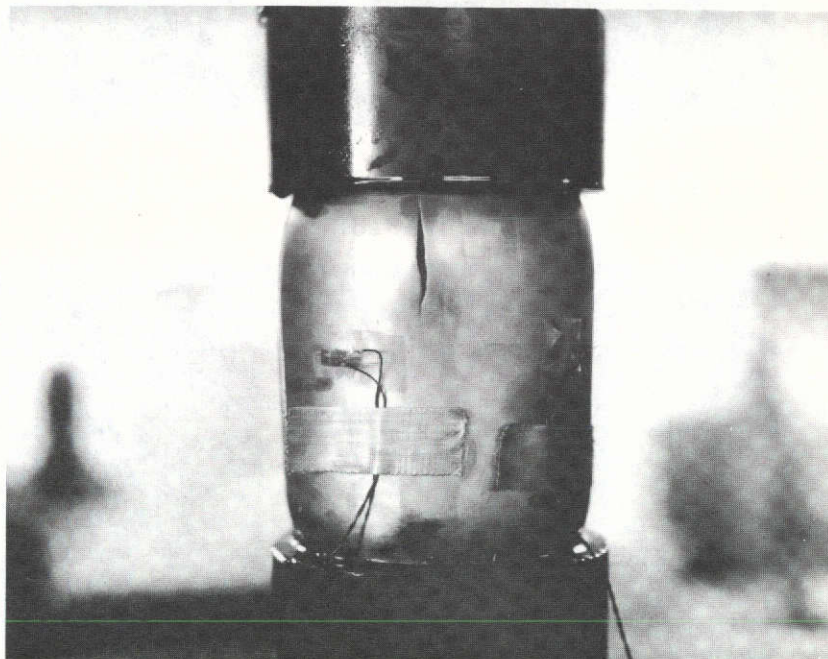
Fracture Surface of Heat Treated Standard Cylinder 10 After Burst
